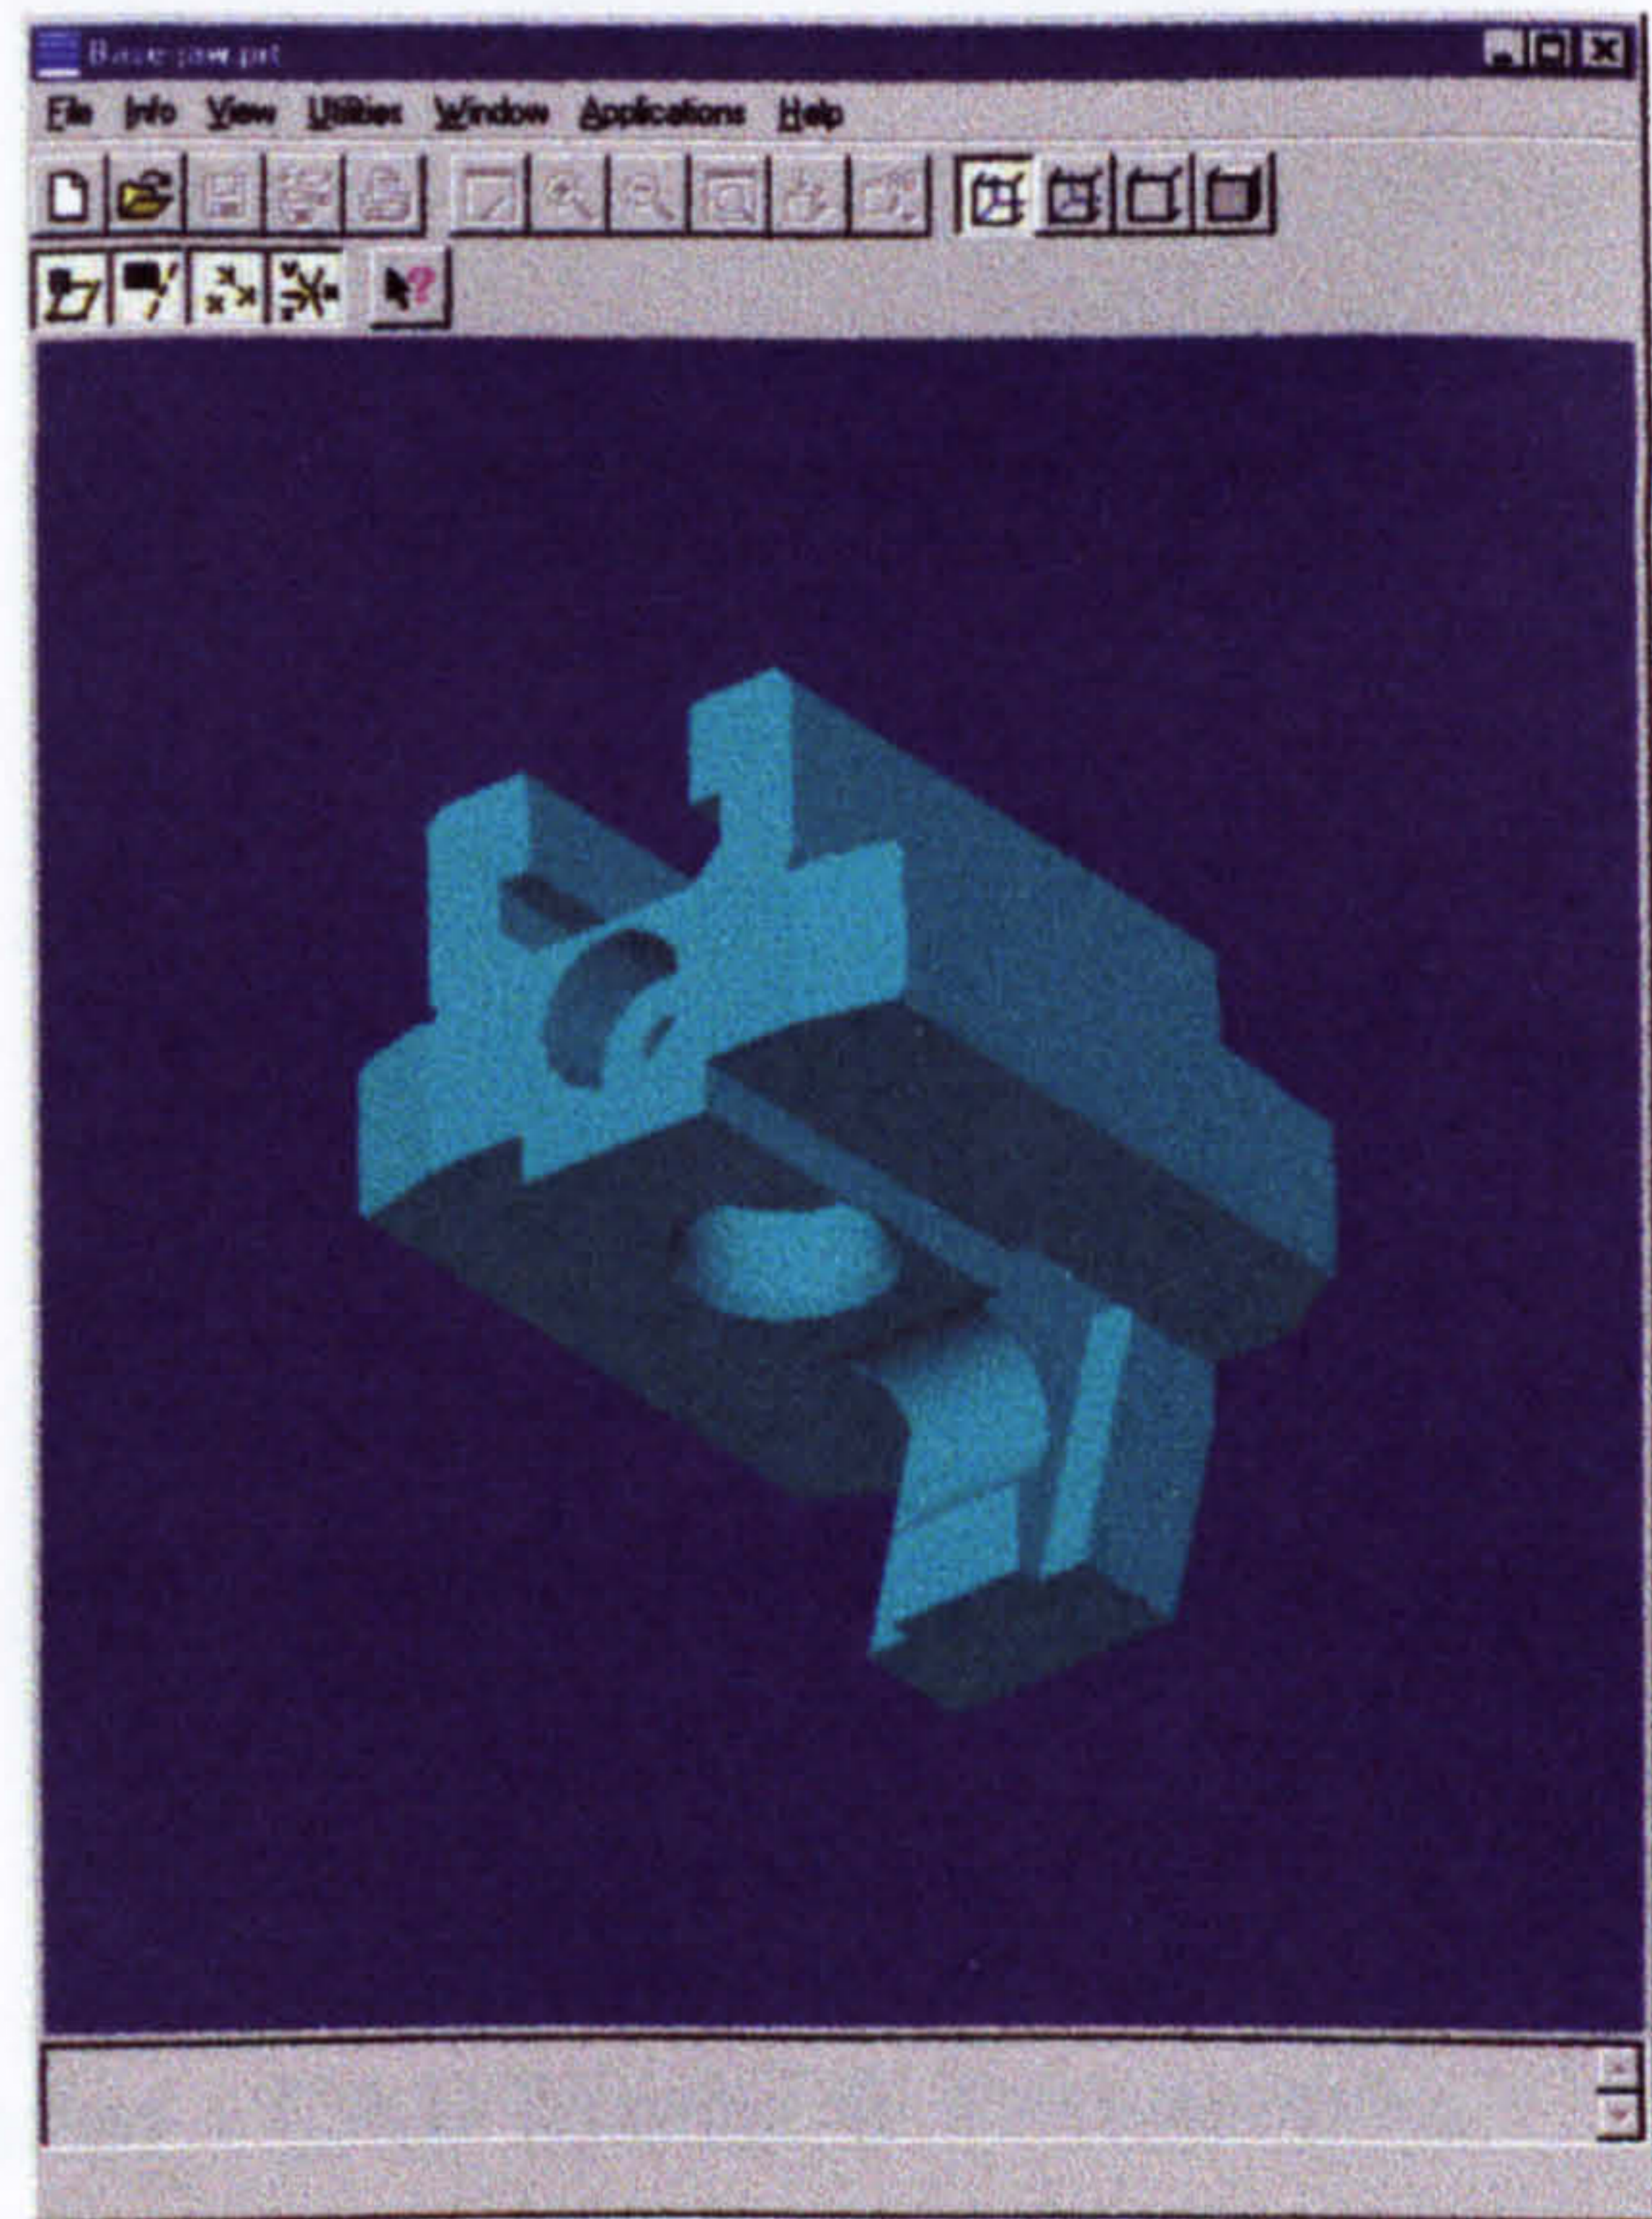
GMT Chuck Wedge Adaptor – Example Manufacturing Drawing
